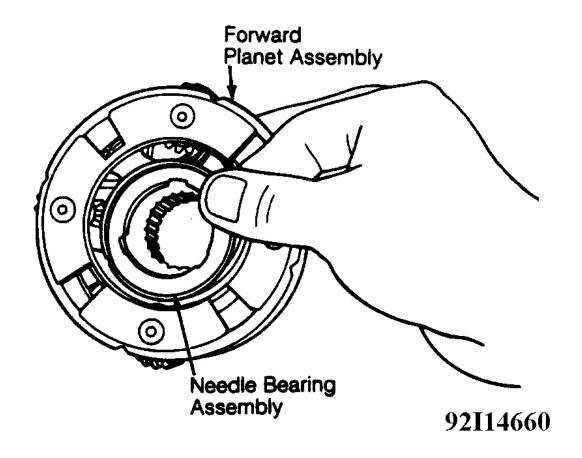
Removing Forward Planet Courtesy of FORD MOTOR CO.
